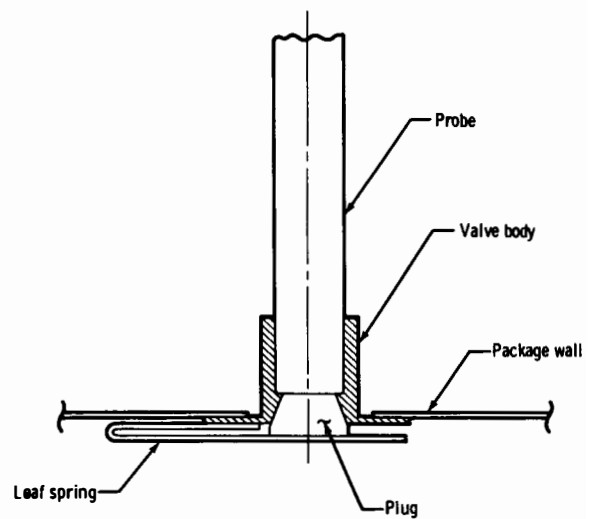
Leaf-spring-loaded plug-valve aperture.
